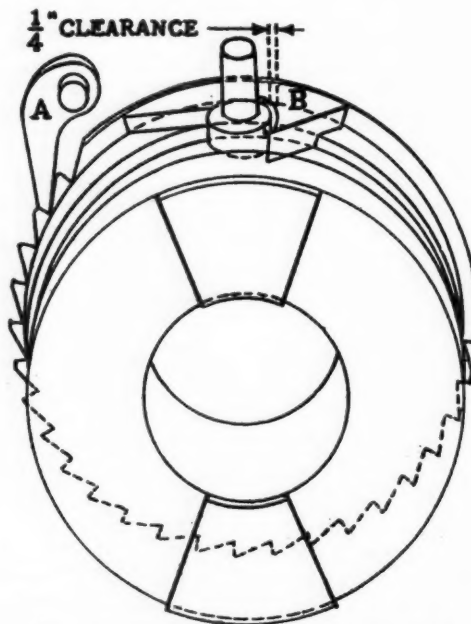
Rear view of rail press, showing "hands up," ready for die to descend
